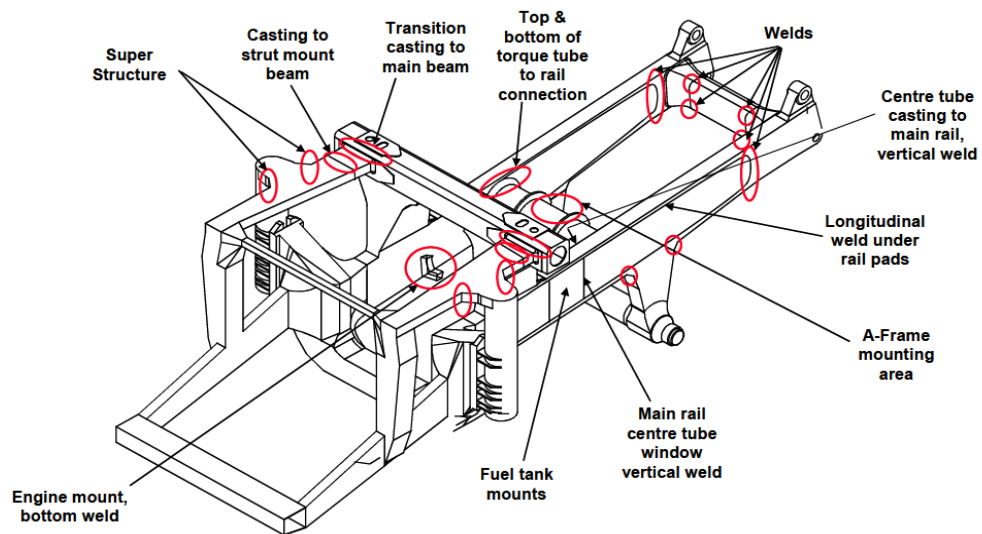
Areas on chassis which have experienced failures/fatigue cracking
